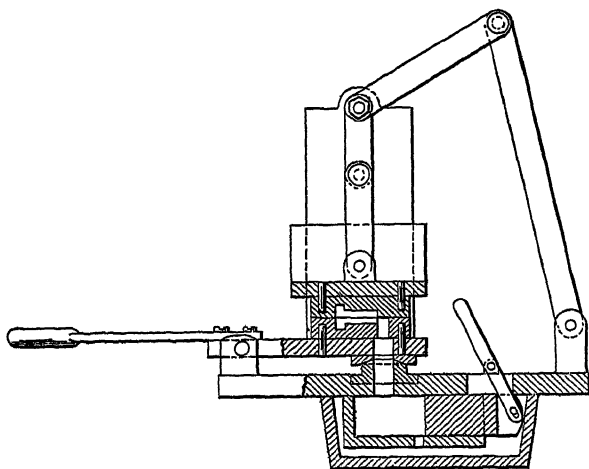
UNDERWOOD DIE-CASTING MACHINE.
